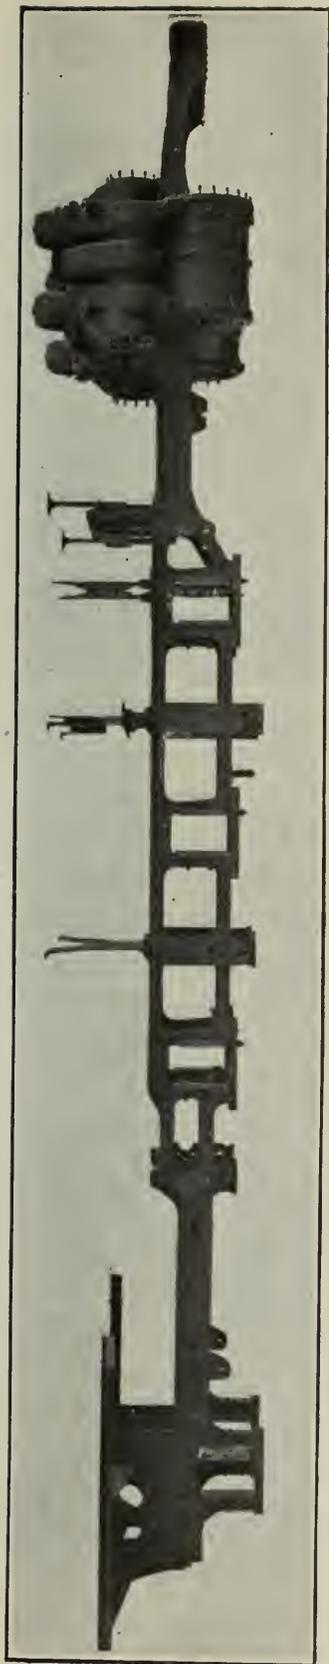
BAR FRAMES, COMPLETE WITH ALL ATTACHMENTS, PACIFIC-TYPE BADEN LOCOMOTIVES.
